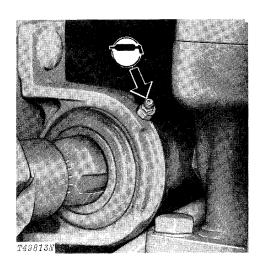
Delimber Transmission Drive Shaft Support Bearing (1 Point)
